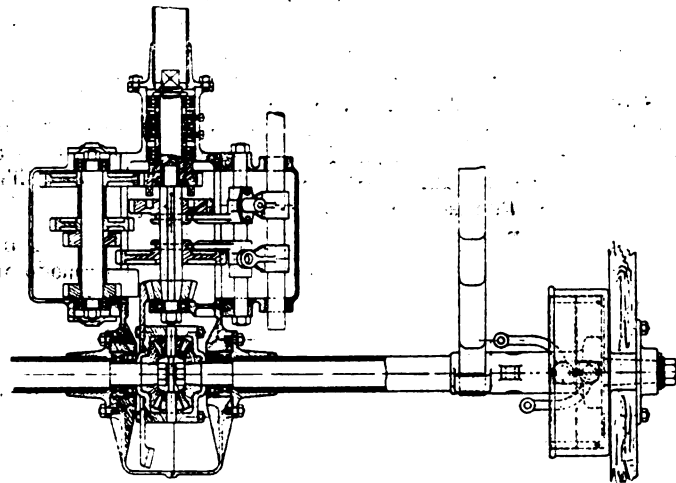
Part Sectional Plan of Gear Box and Back Axle of S.K. Simplex Car.
